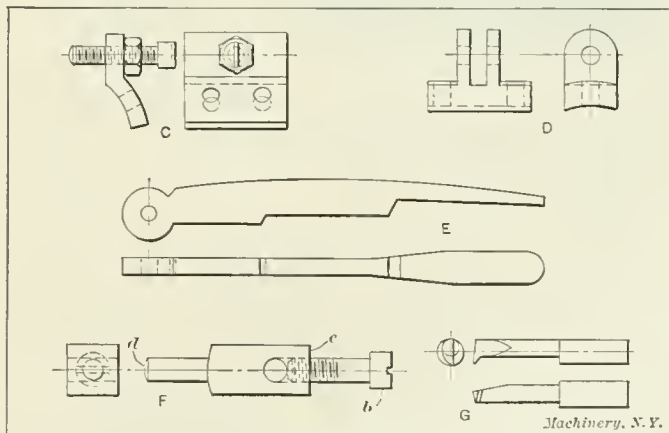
Detail Views of the Brackets, Handle, Tool-holder and Recessing Tool
